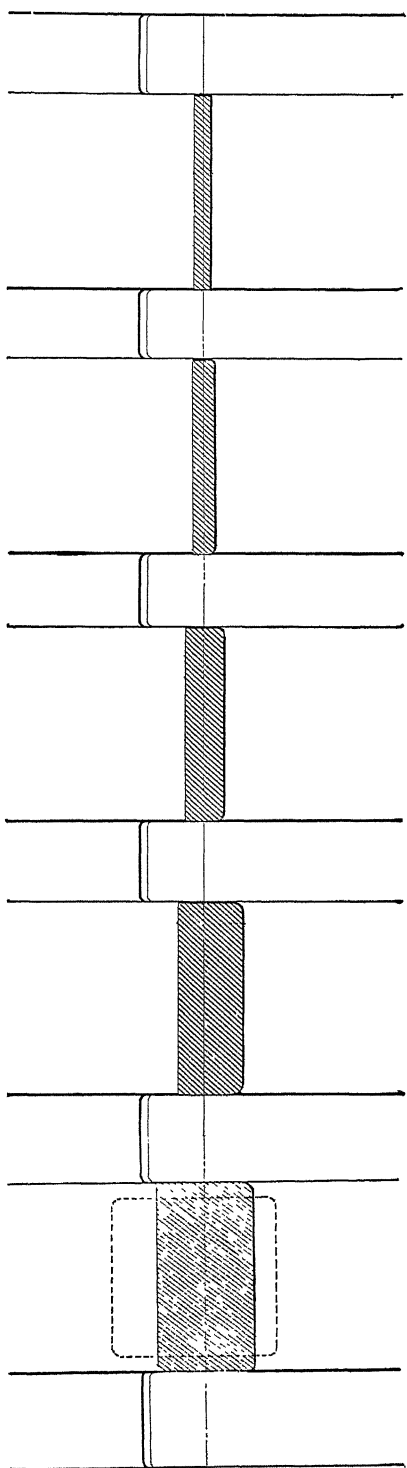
SHOWING METHOD OF ROLLING A 6-IN. FLAT.
